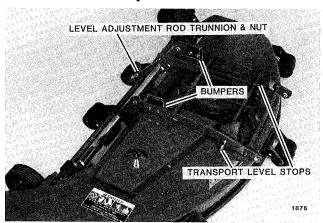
48 in. (122 cm) Side Discharge Mower Adjustments
